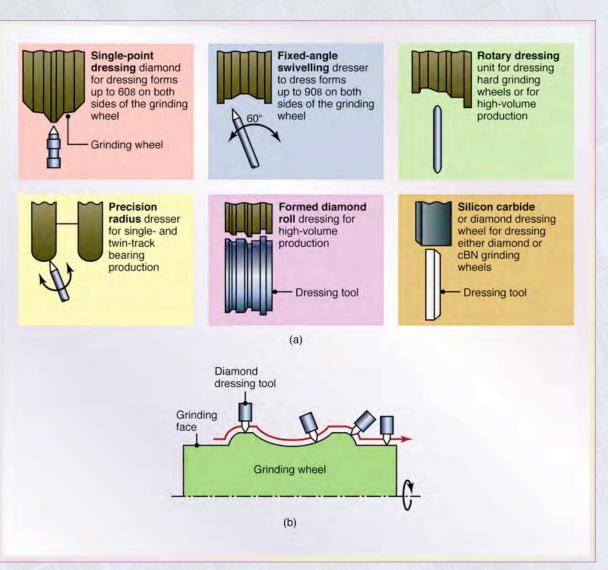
(a) Forms of grinding-wheel dressing. (b) Shaping the grinding face of a wheel by dressing it with computer control. Note that the diamond dressing tool is normal to the surface at point of contact with the wheel. *Source*: Courtesy of Okuma Machinery Works Ltd.
